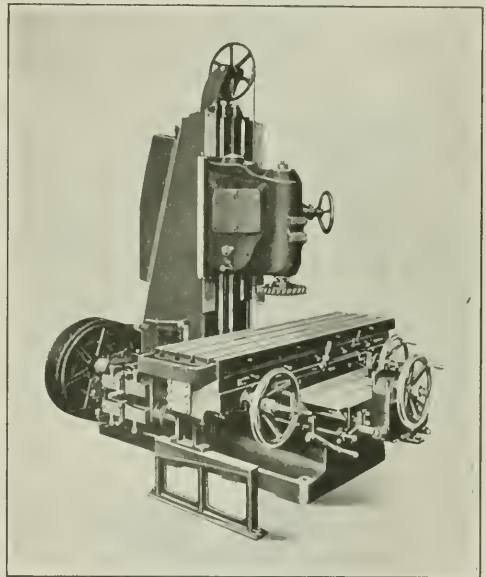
No. 10-A Jackson Vertical Milling Machine designed for Production and Die-sinking
